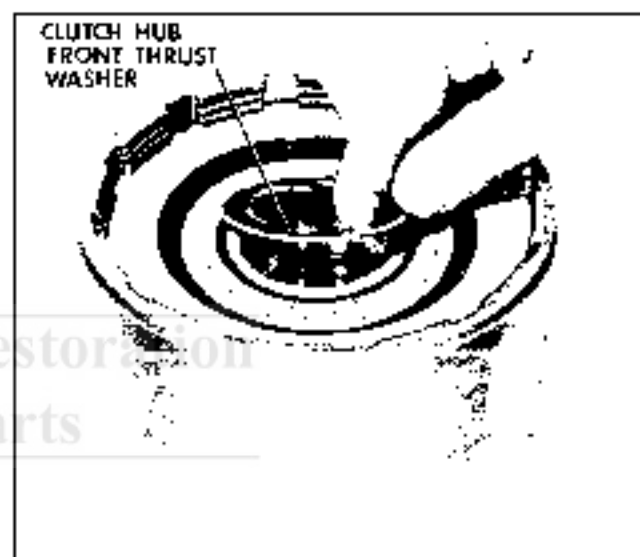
F-47 Removing Clutch Hub Front Thrust Washer
